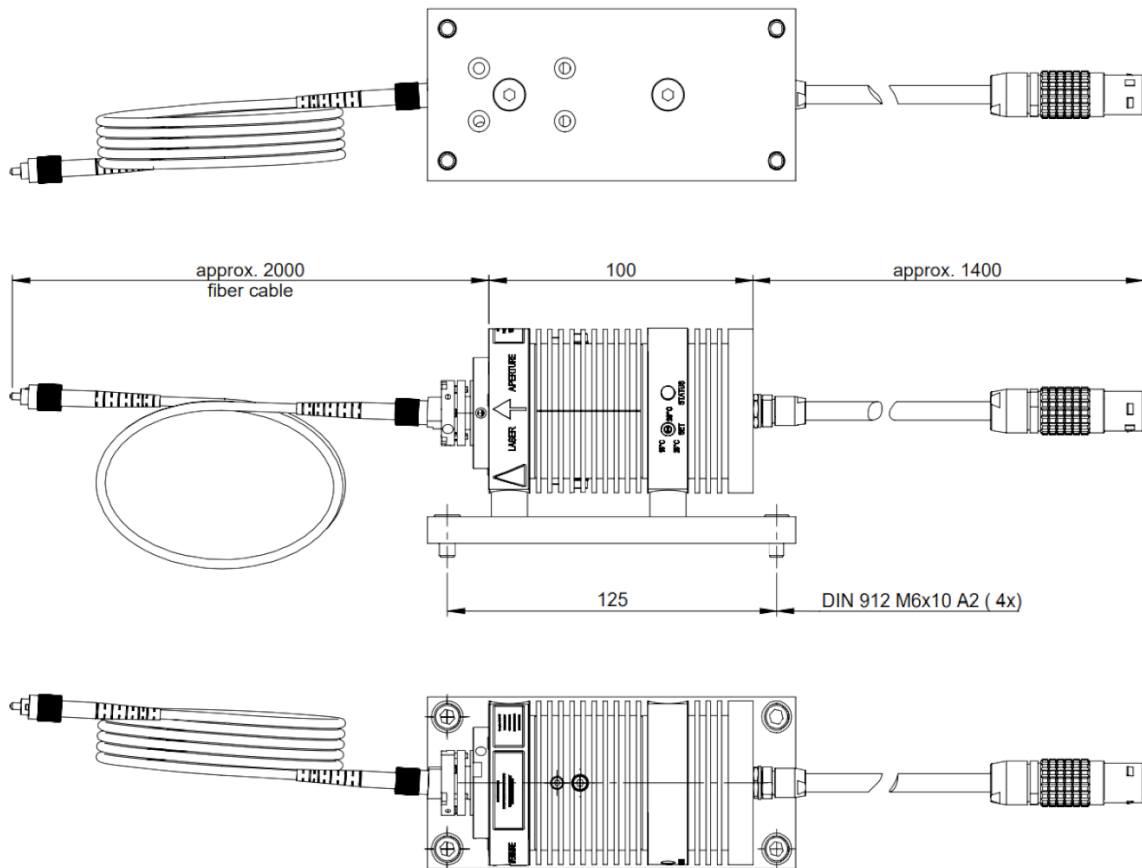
Dimensions of an LDH laser head with mounting plate and fiber cable
